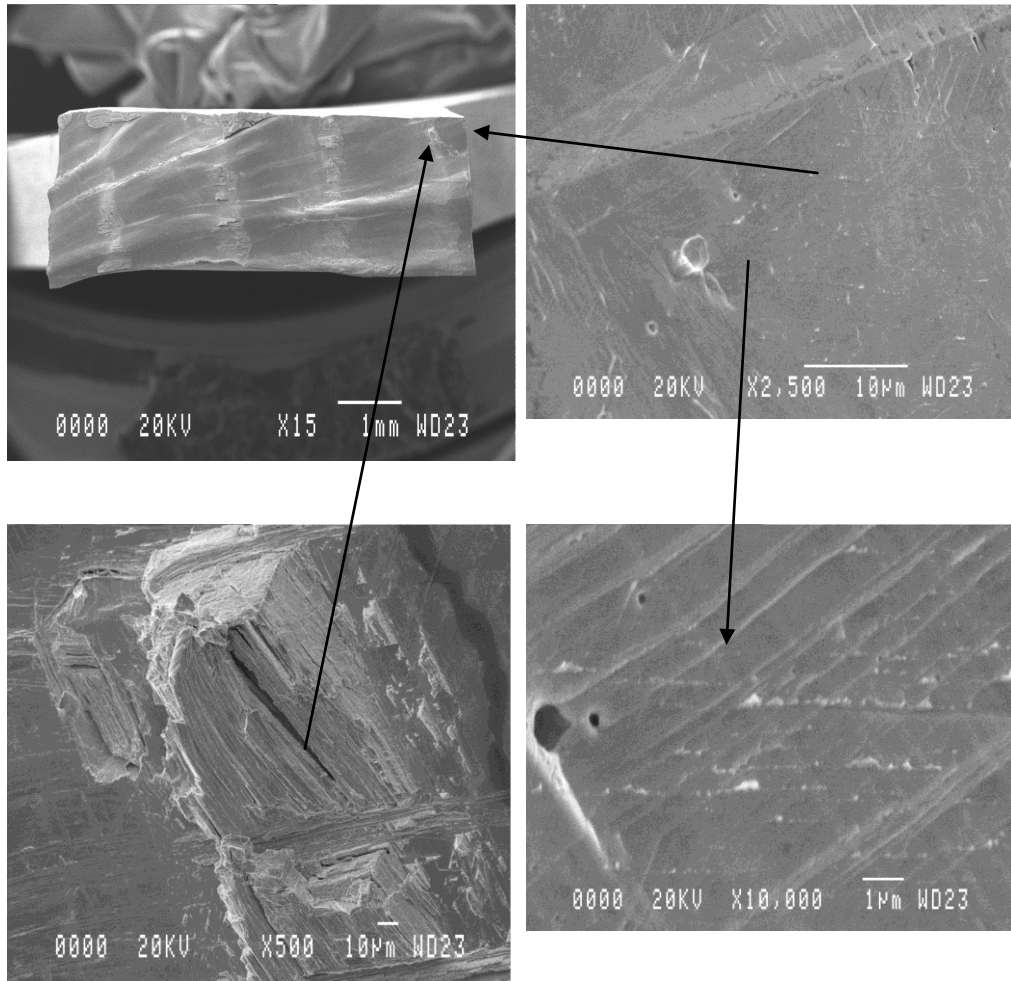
Fatigue fracture surface of specimen 1042-1-5. Note the fine ridges in the lower left picture. They appear to be striations.
